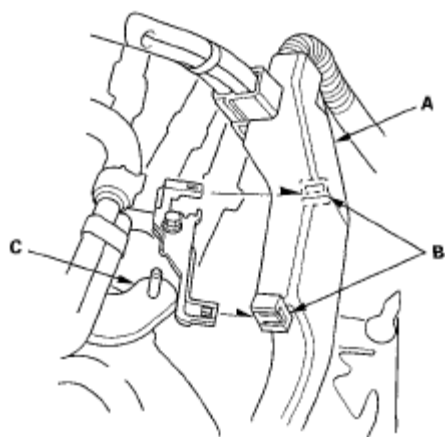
Identifying Engine Wire Harness Cover On Lock Tab
